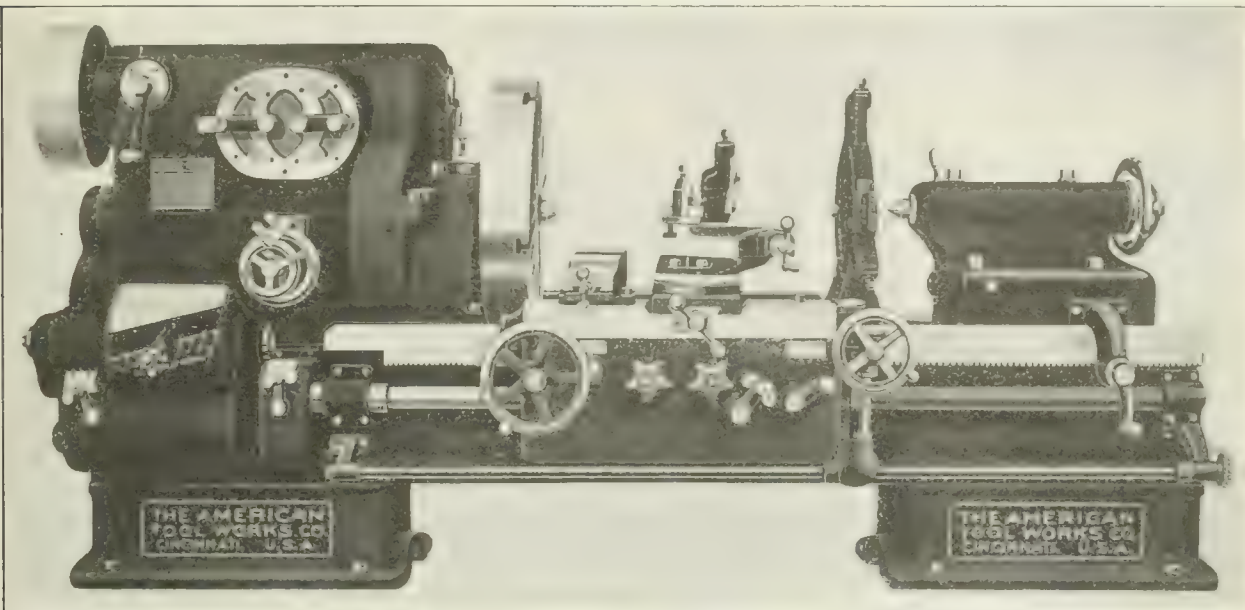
The 30 In. High-Duty Lathe with Belt Drive and 12-Speed Head Built by the American Tool Works Company, Cincinnati.
